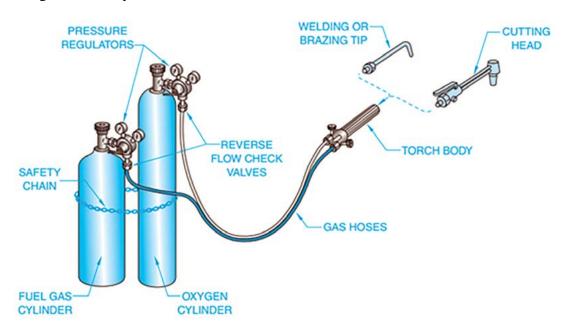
Oxyfuel welding and cutting machine
